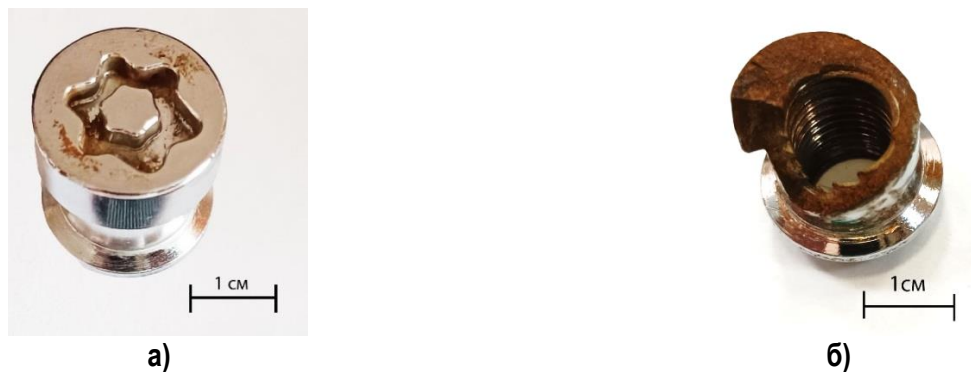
Appearance of the wheel lock: a) before destruction; b) after destruction
